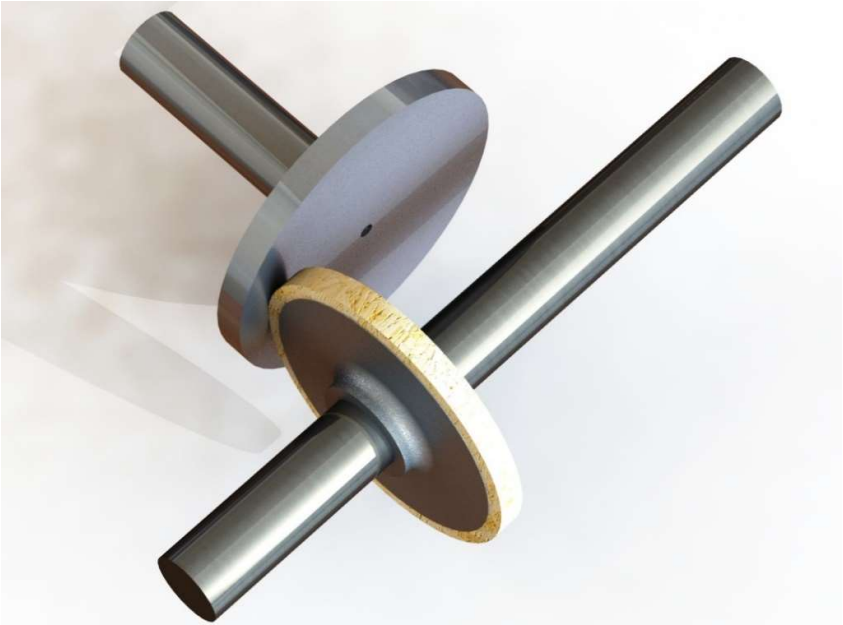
Lambert-style friction drive with aluminium driving disk and fiber-faced driven wheel
